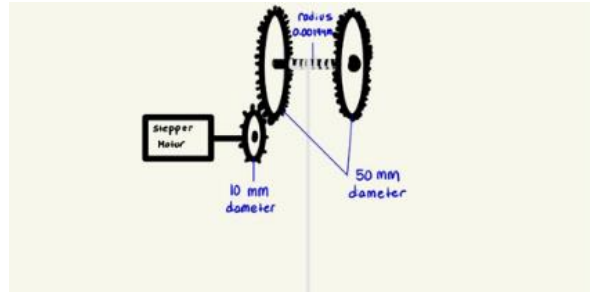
Technical drawing of the gearbox created to generate torque for the gripper. Featuring a 5:1 gear ratio
